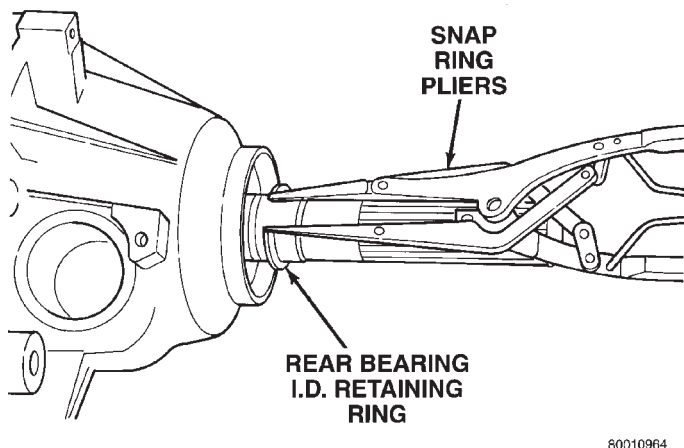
Rear Bearing I.D. Retaining Ring Removal
